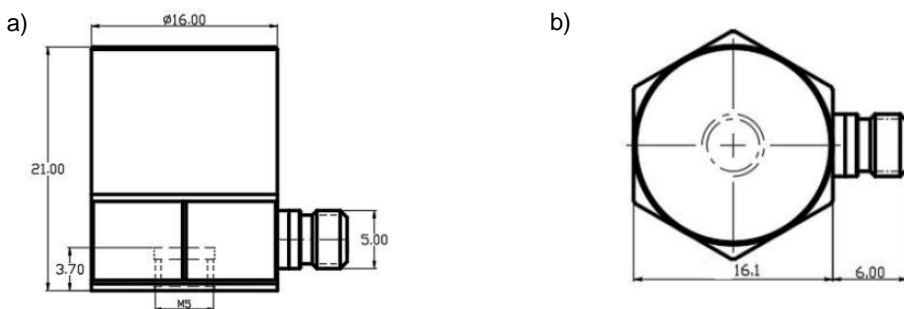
Mechanical dimension SSA-P8UCA5 a) side view b) top view
